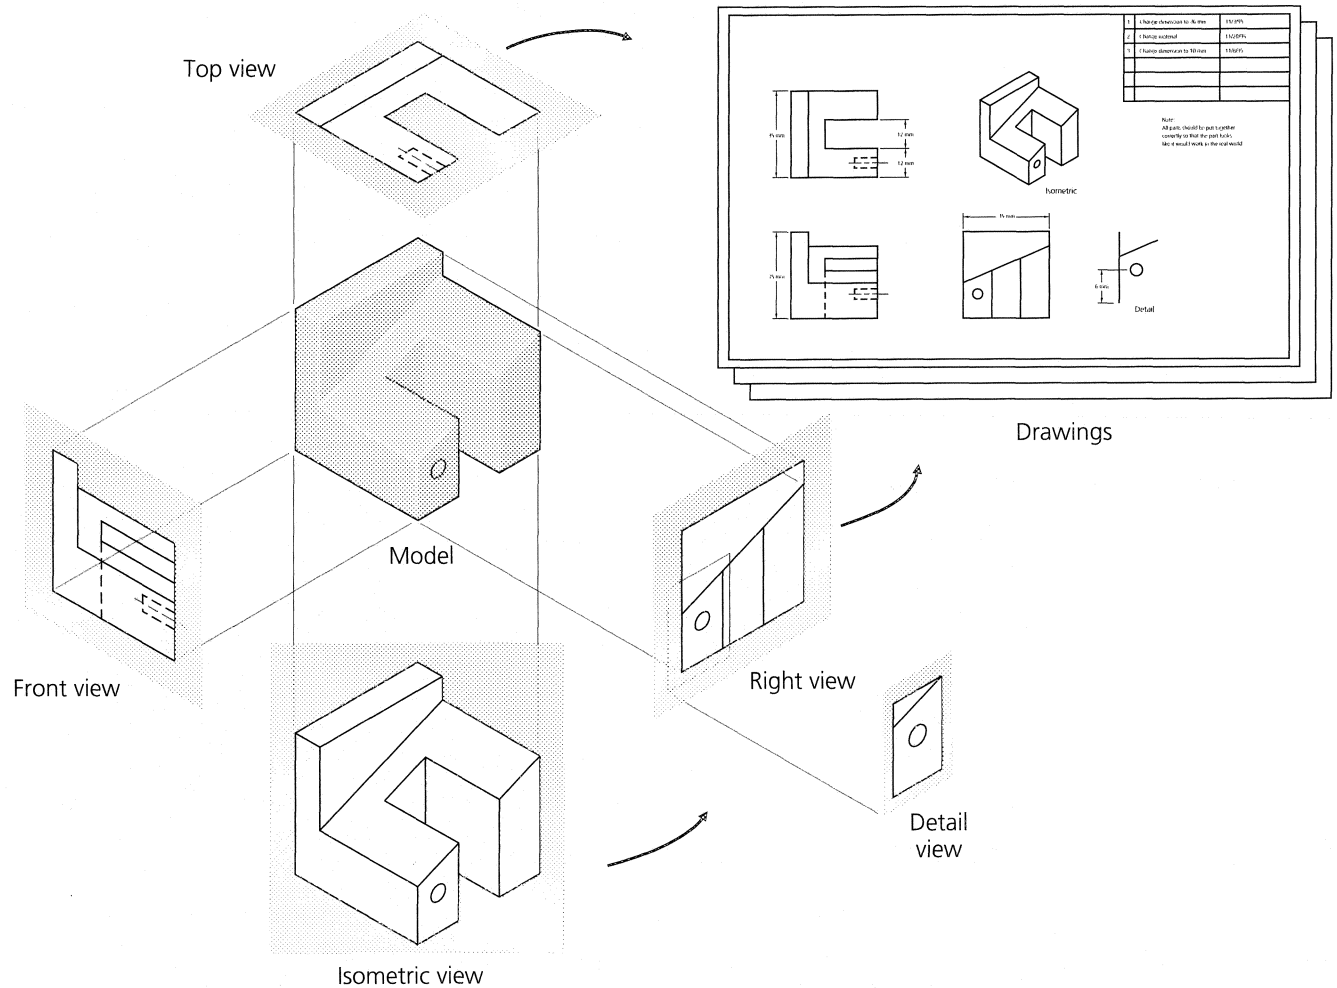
The Model Is Used to Generate the Views of the Drawing
